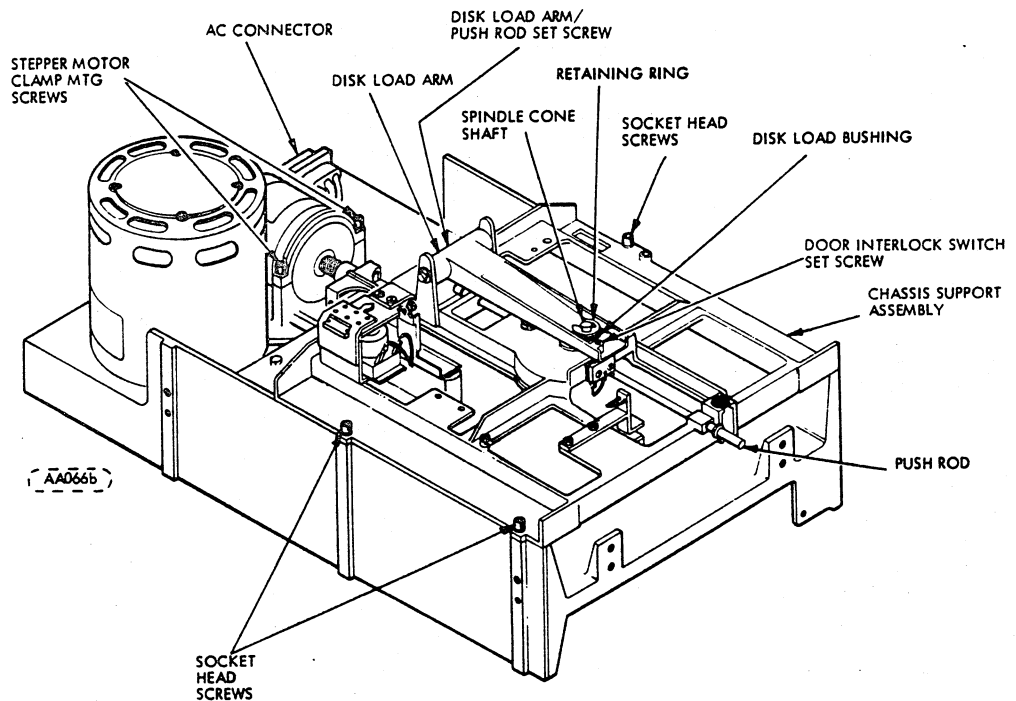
CHASSIS BASE ASSEMBLY
